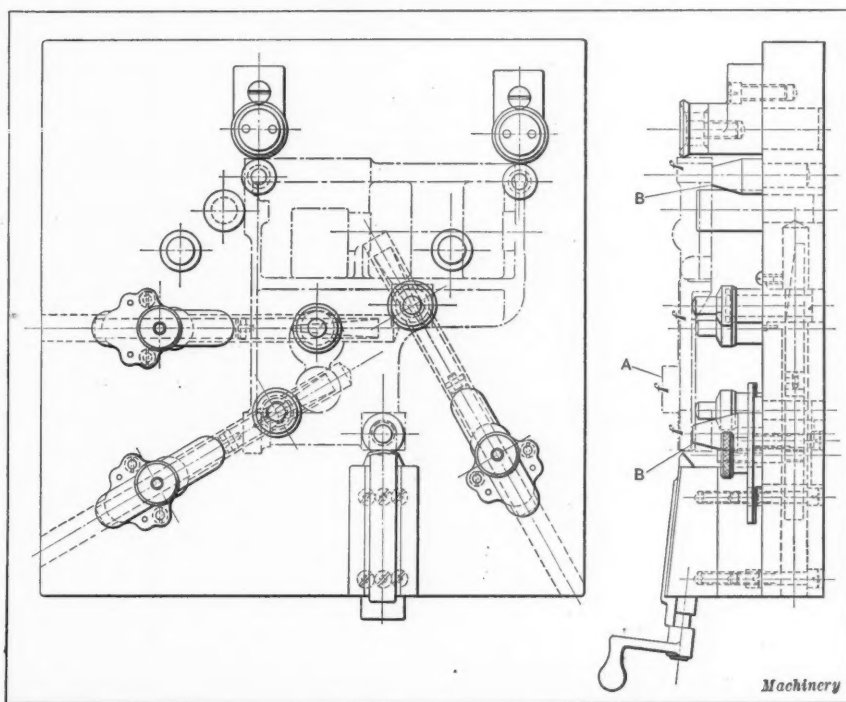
Fixture in which Adjustable Wedge Stops are used
